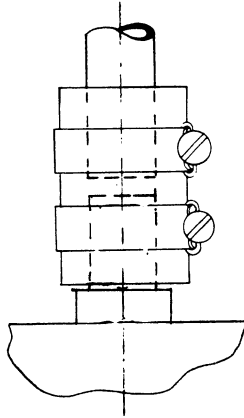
Optimum Location of Clamps to Minimize Area of Tygon Exposed to Vacuum
